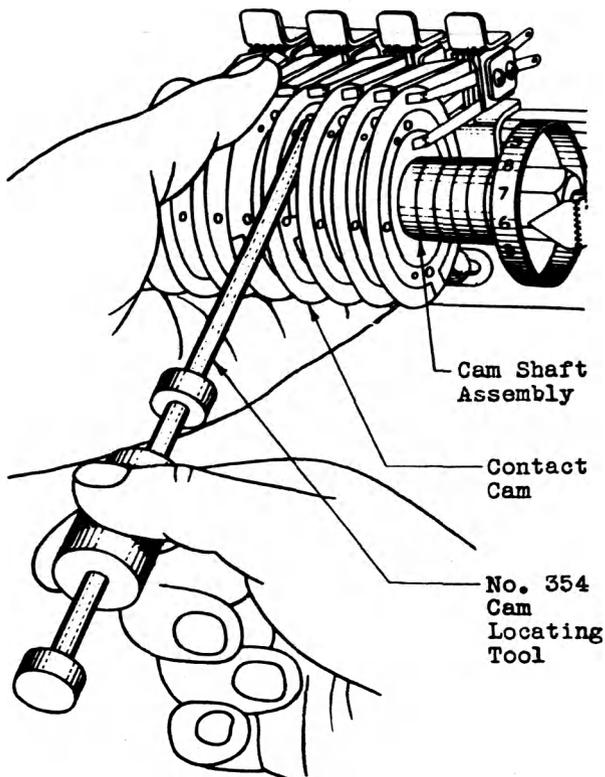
Method of Locating Contact Cams with the No. 354 Cam Locating Tool
